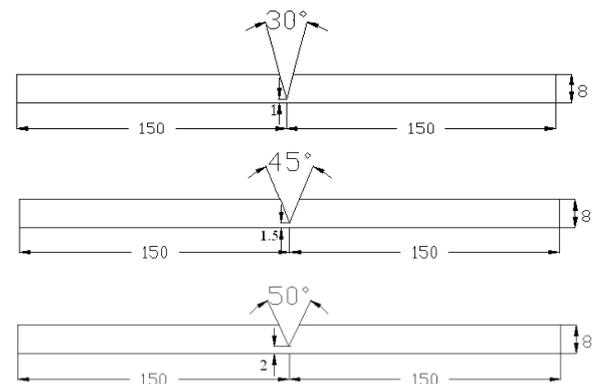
Welding geometry of V Groove butt weld joint with groove angle 30°, 45°, 50° respectively.
